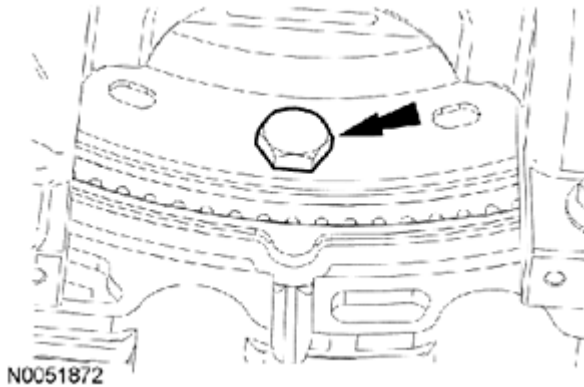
Identifying Oil Pump Chain Drive Tensioner And Shoulder Bolts
